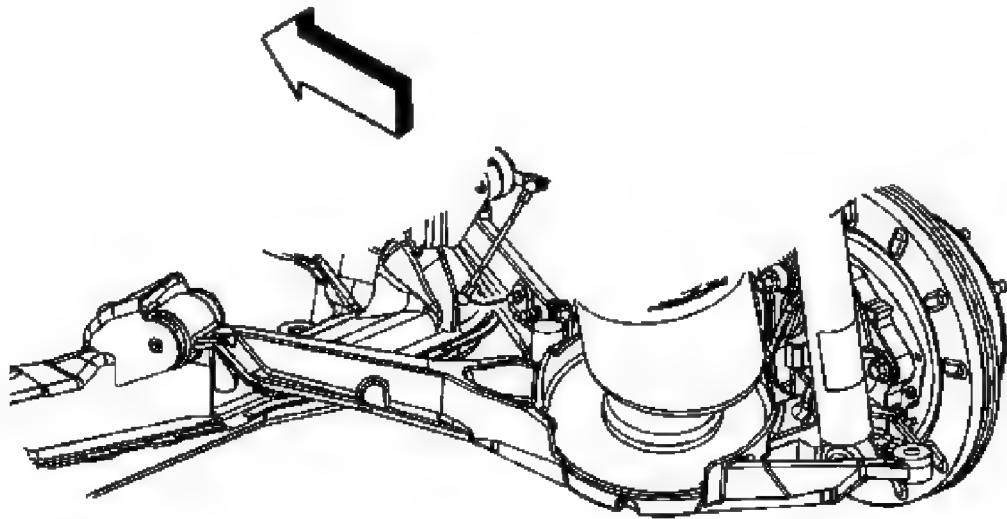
Identifying Electronic Suspension Front Position Sensor Link
